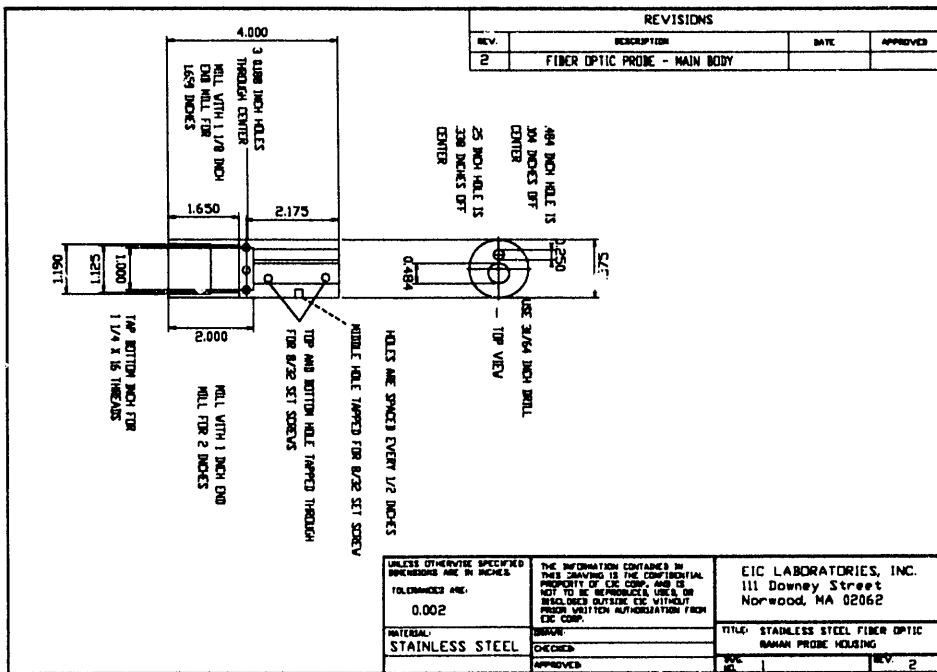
Mechanical drawings of the fiber optic stainless steel SERS probe.
